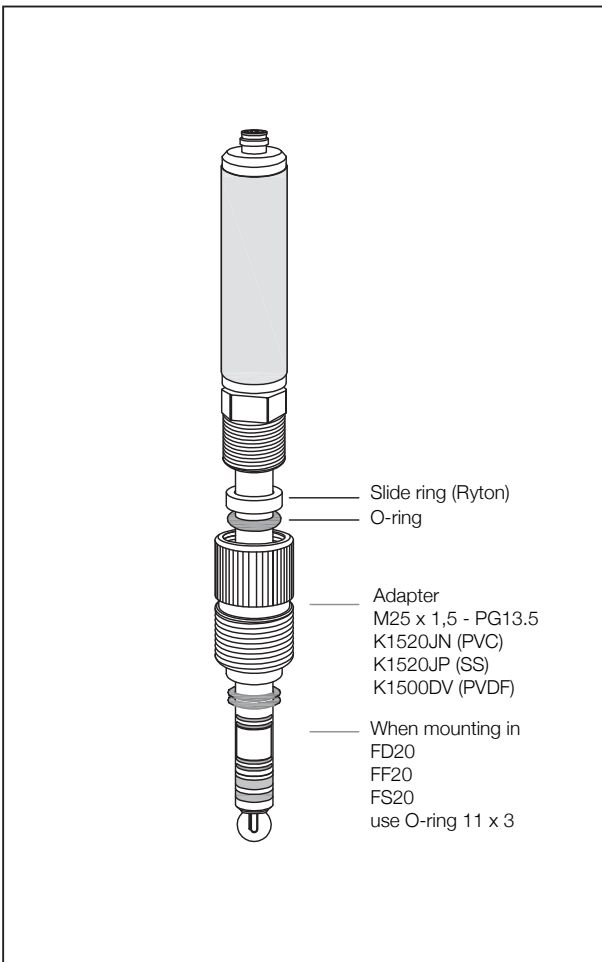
Simple mounting of sensor in PR10 retractable fitting
